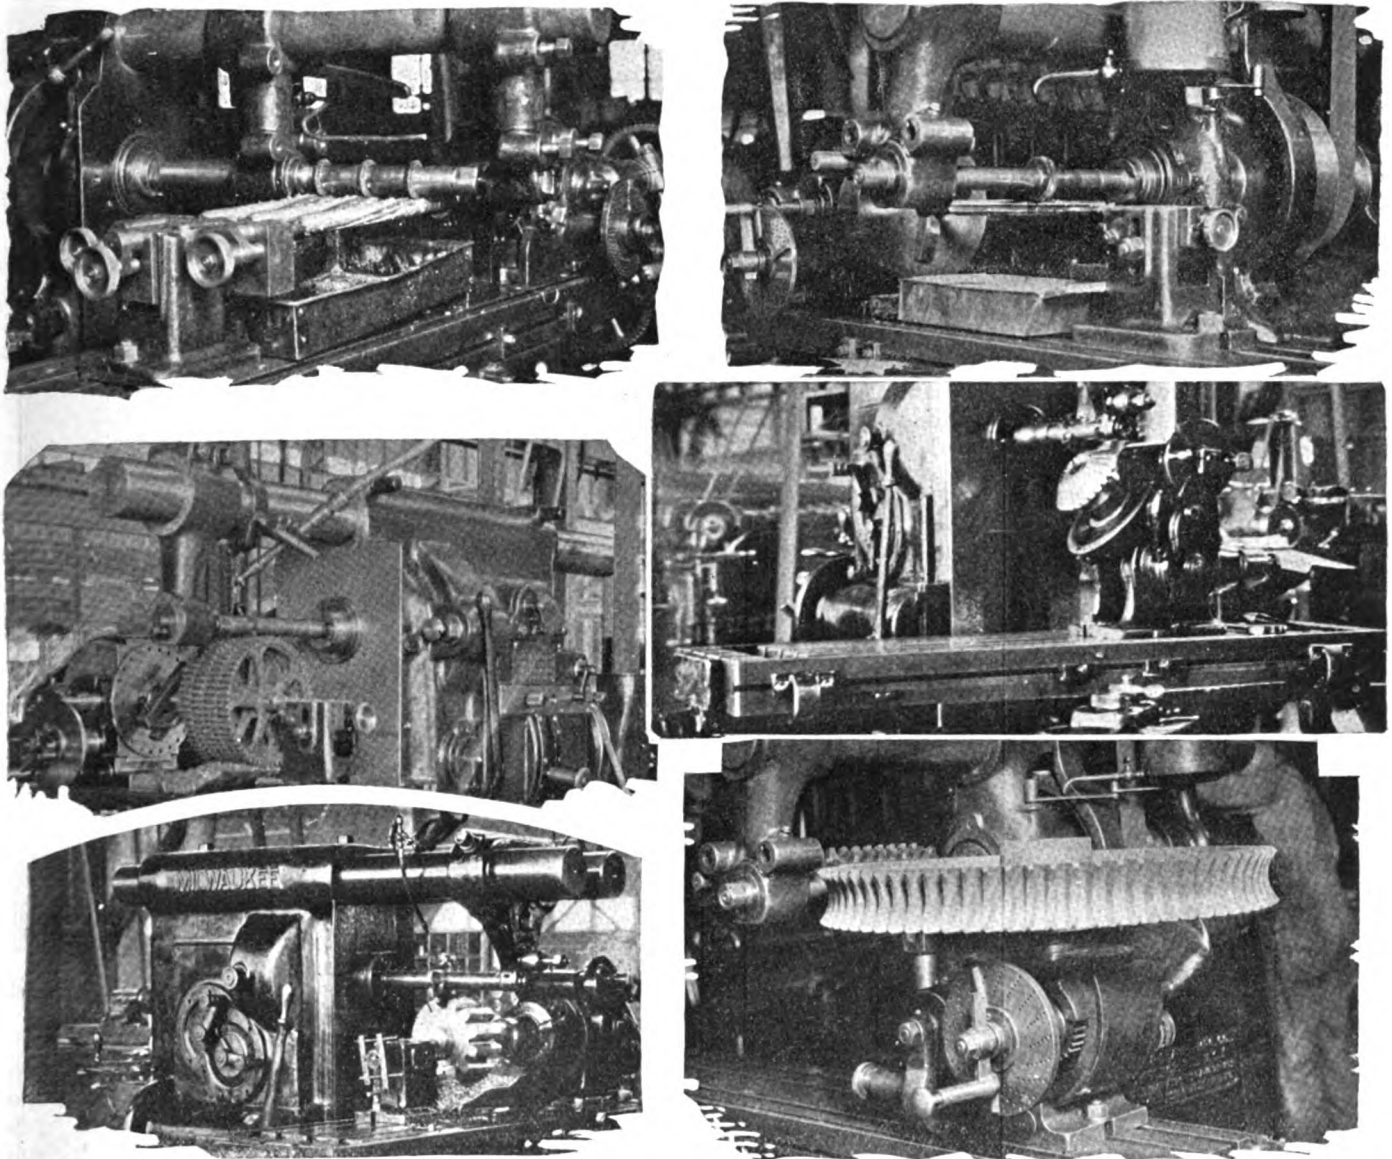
Various types of jobs performed on milling machines in the railroad toolroom
